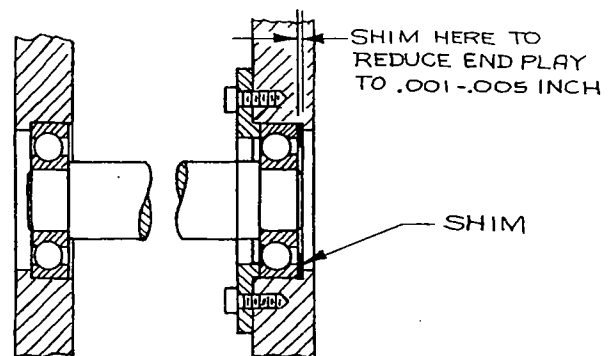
Installation of a shim to remove play in a shaft mounted in ball bearings.
